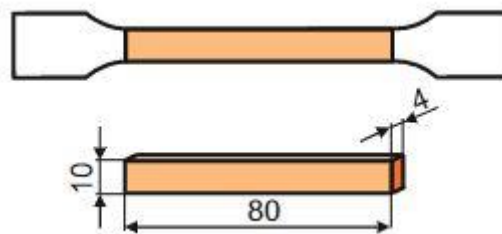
Standard bending test specimen and its relation to the tensile test specimen.
